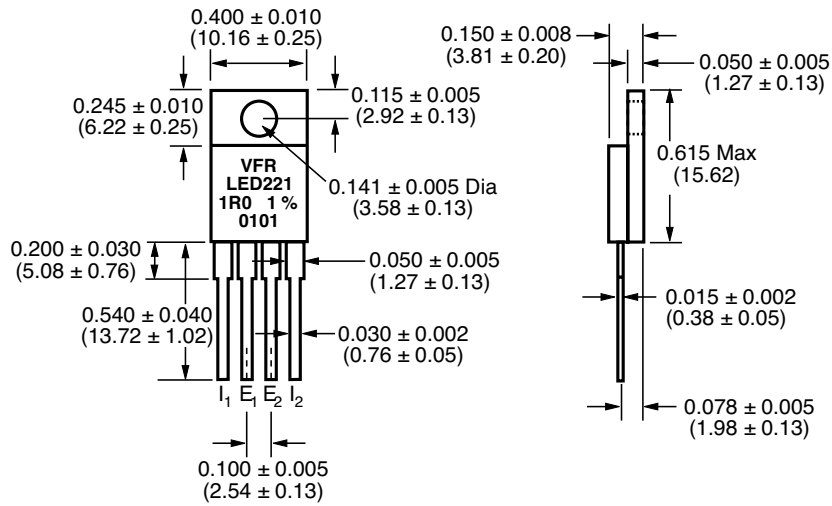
LED1625 Dimensions in Inches (Millimeters)
